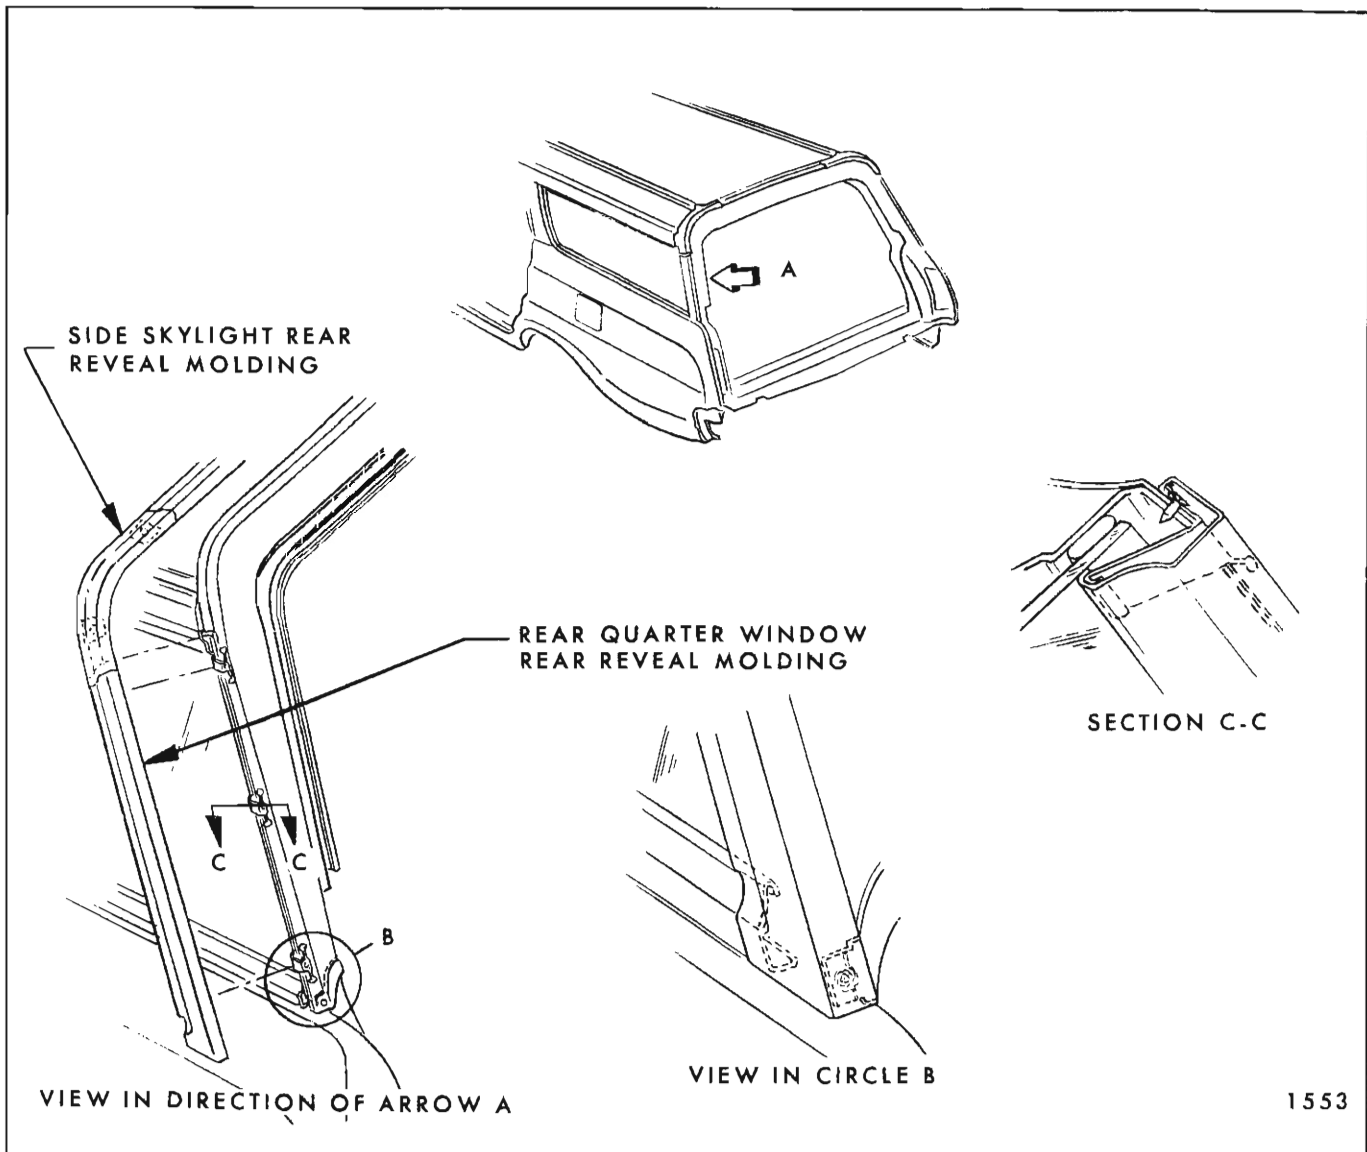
E23—Rear Quarter Window Rear Reveal Moulding
